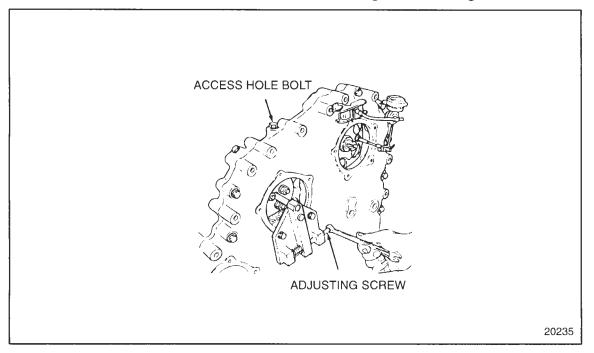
Adjustable Idler Gear-to-Camshaft Drive Gear Lash Adjustment
